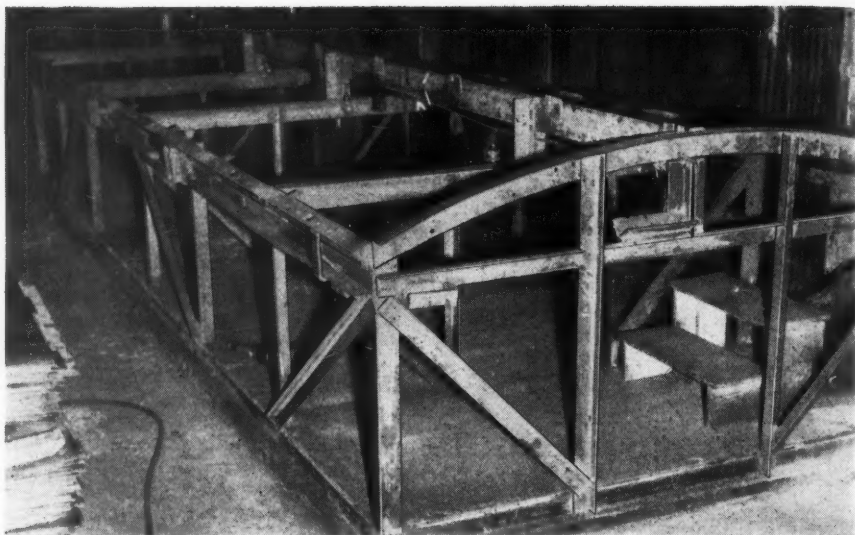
View of Semi-Welded and Riveted Constructed Roof Fitting and Tack Welding Jig.
